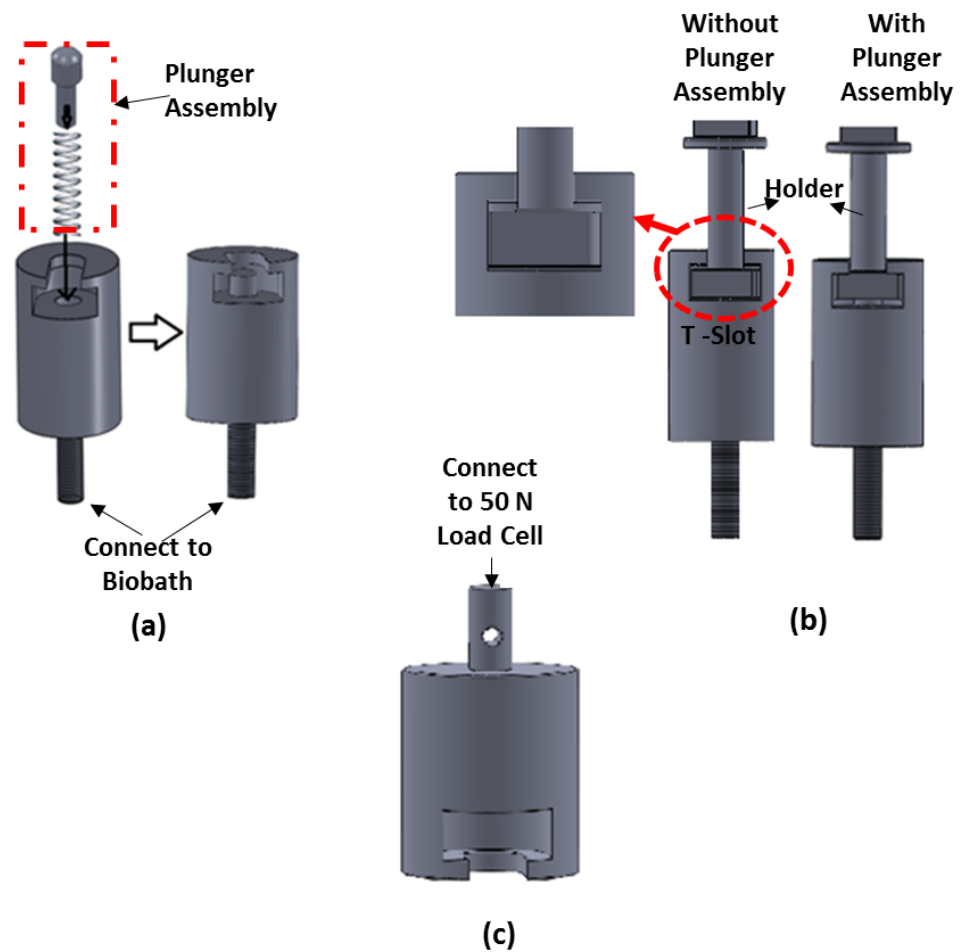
Tissue Specimen Holder for the Uniaxial Tensile Tester
